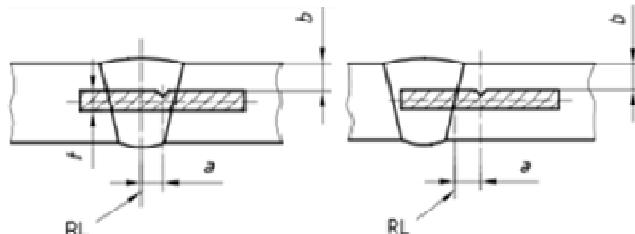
Sampling of Charpy specimens for determination impact toughness of weld metal and HAZ
